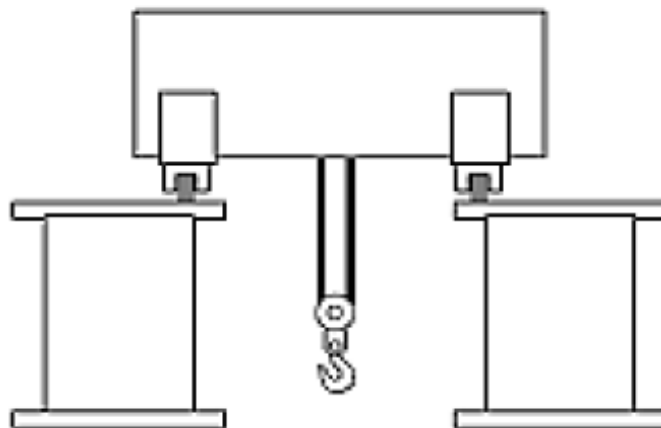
Section view of a double girder bridge crane (Treloar, 2011)
